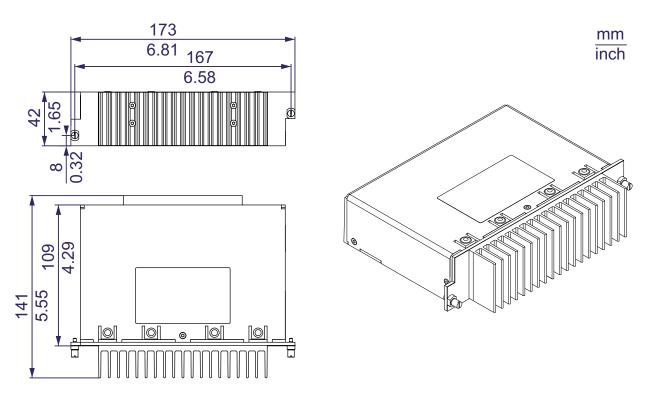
Power supply modules: Dimension drawing power supply module GPS3-P
